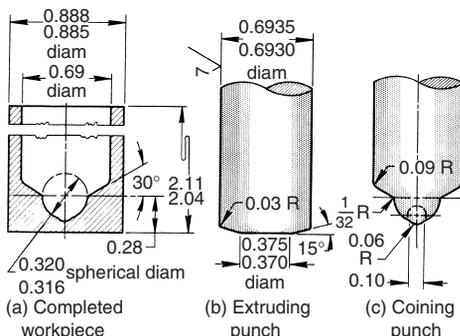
5120 steel valve tappet (maximum hardness: 143 HB) produced by extrusion and coining with punches shown. Dimensions given in inches
